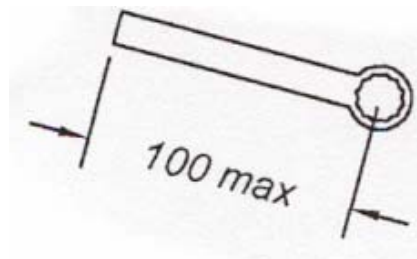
Recommended Brake Adjustment Ring Spanner, 8mm.
